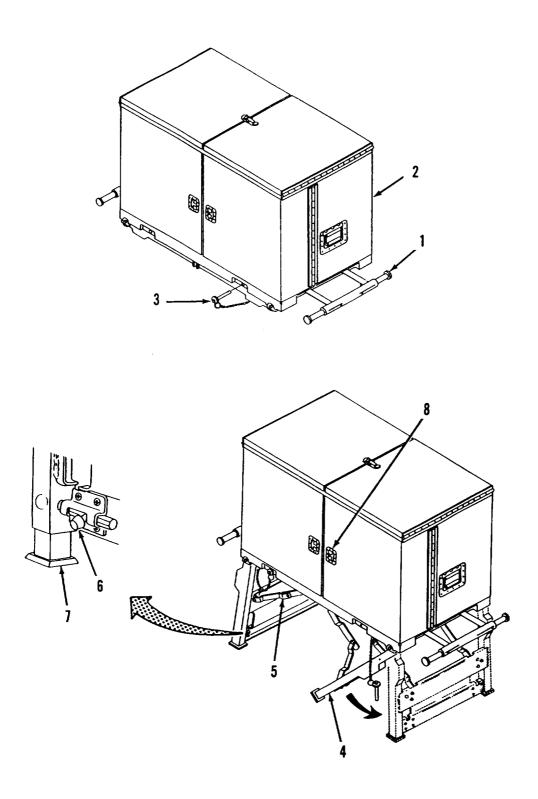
Cabinet Assembly Setup (Sheet 1 of 2).
